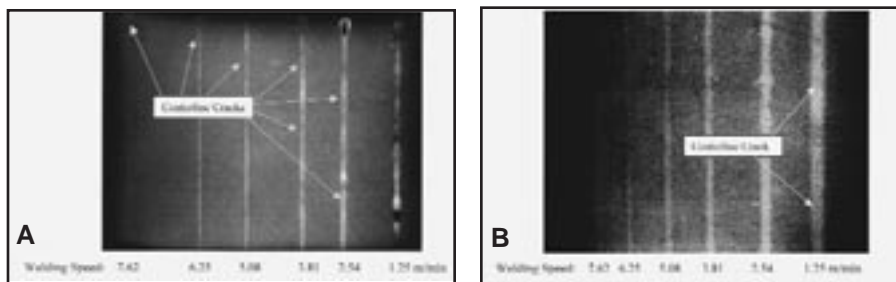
X-ray radiographs indicating centerline cracking in laser welds (1045 steel, bead-on-plate, 6.35 mm, CO₂ laser, 6 kW, welding speed of 1.25 to 7.62 m/min). A — Single-beam laser welds; B — dual-beam laser welds.
